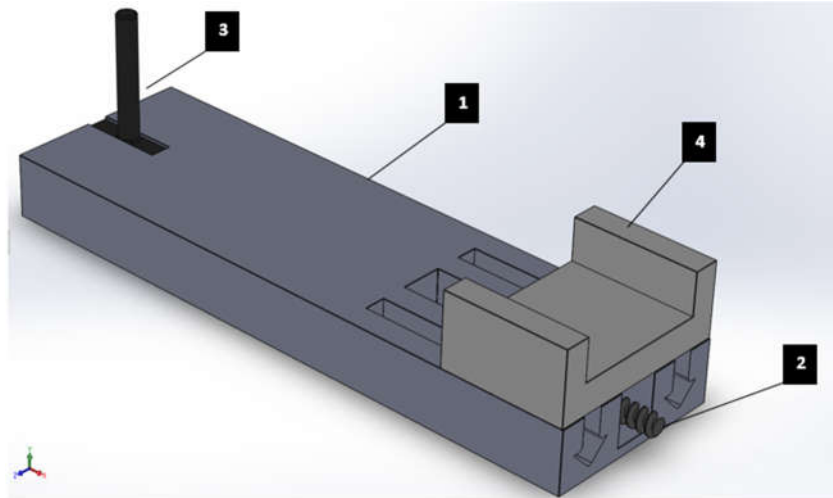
Isometric View of the Initial Tensile Loading Design with the Major Parts Numbered
